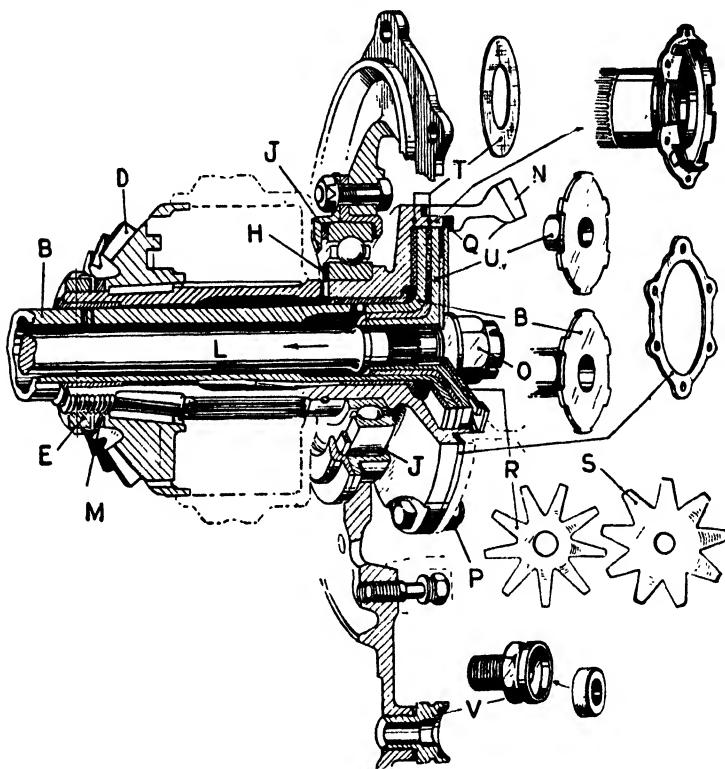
Friction-Damped Spring Drive—Normally Aspirated Engines.
